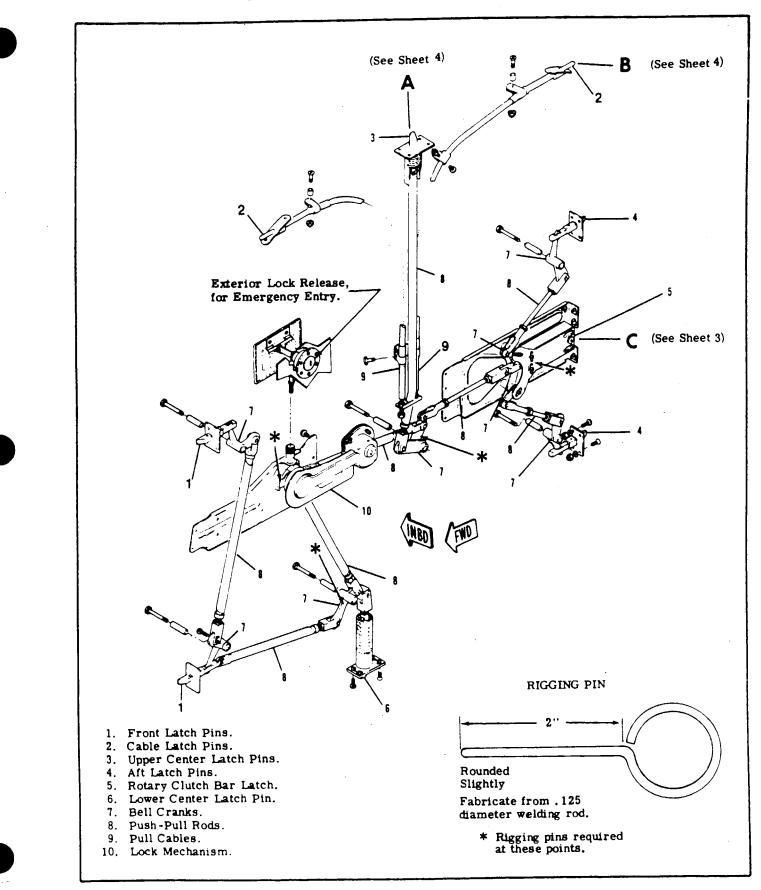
Door Latch Mechanism (Sheet 1 of 4)
